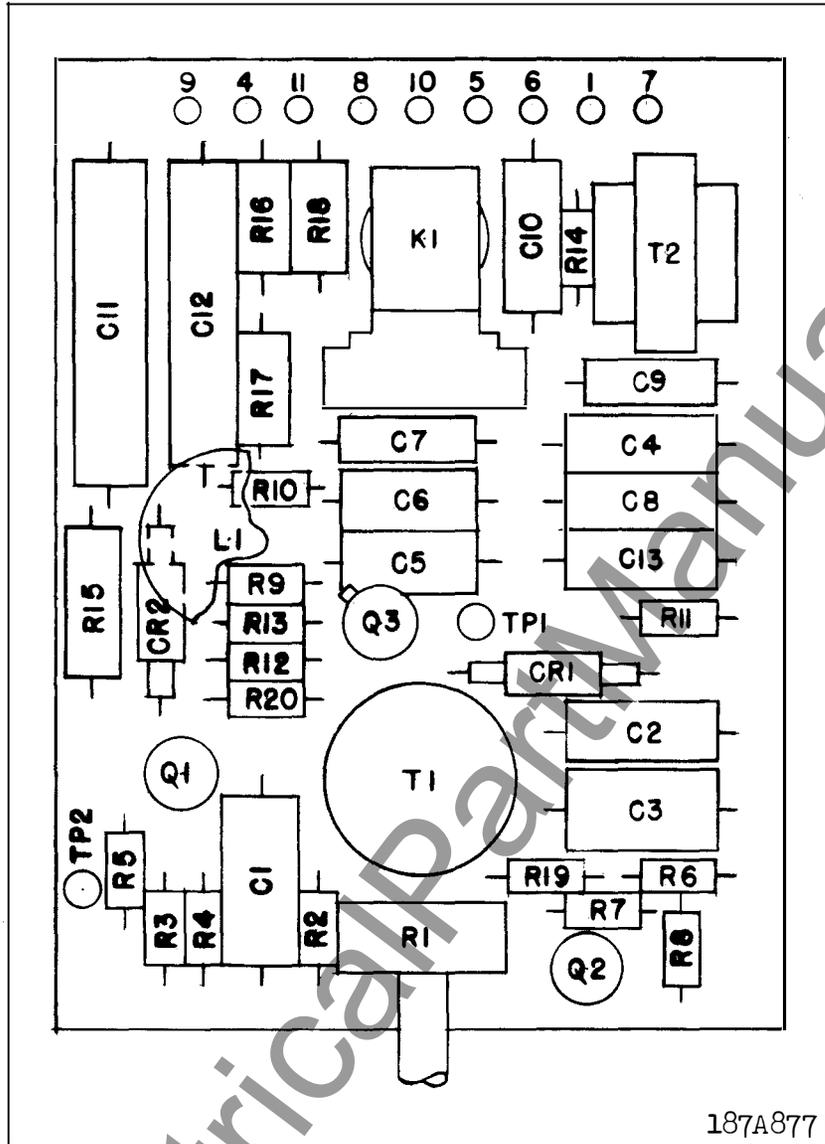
Printed Circuit Board Component Location - Type TC Voice Adapter
